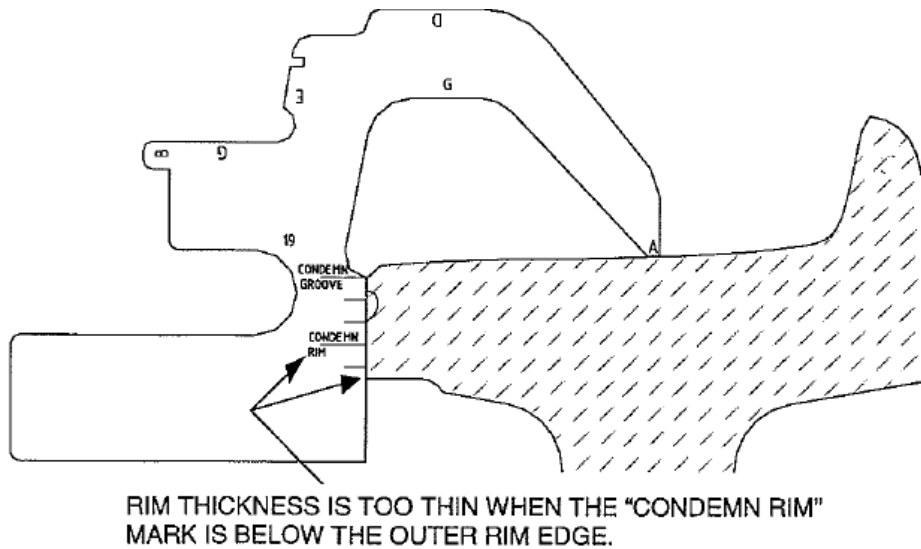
Wheel Condemn Gauge No. 300008 - thin rim indication
